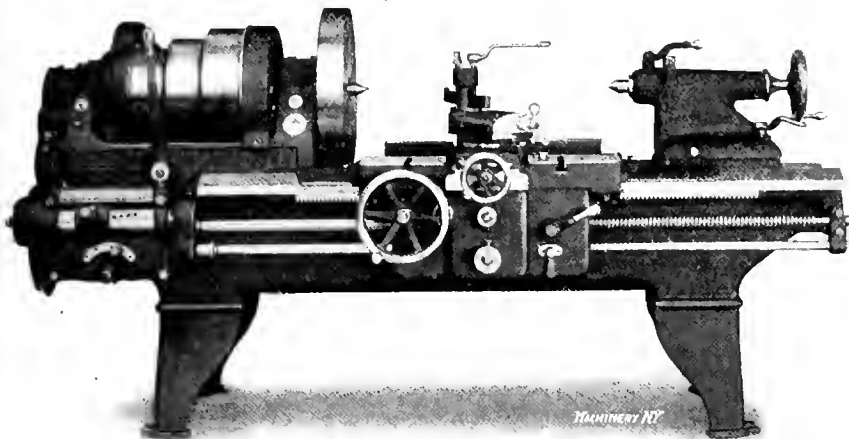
R. K. LeBlond Machine Tool Co.'s 20-inch Heavy-duty Engine Lathe
